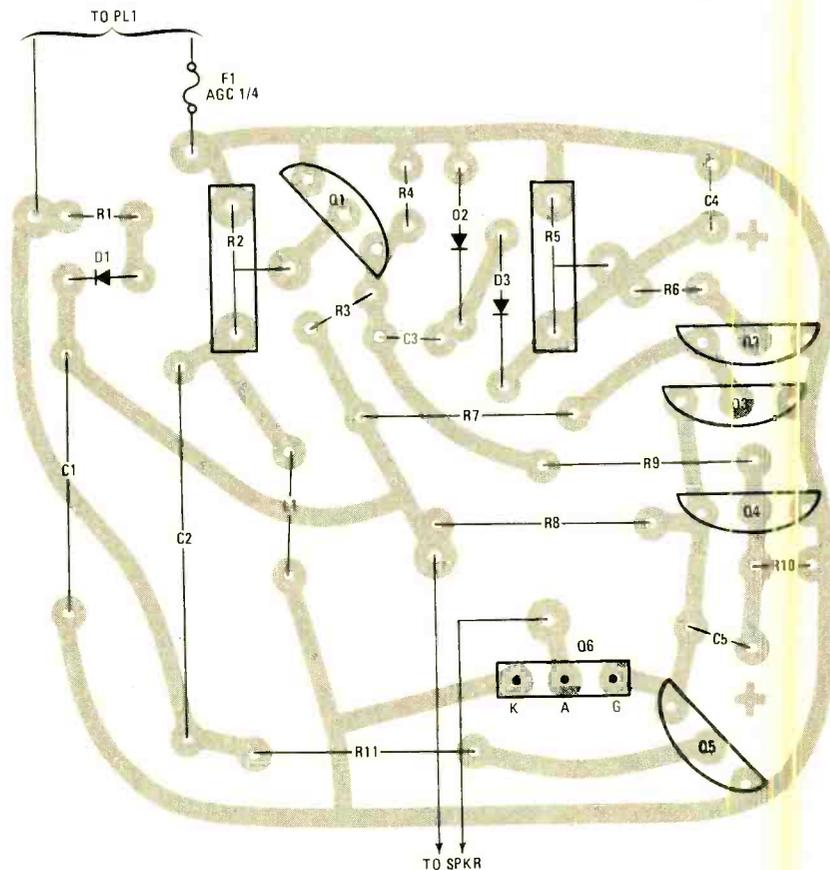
COMPONENT PLACEMENT diagram for the line receiver PC board.
